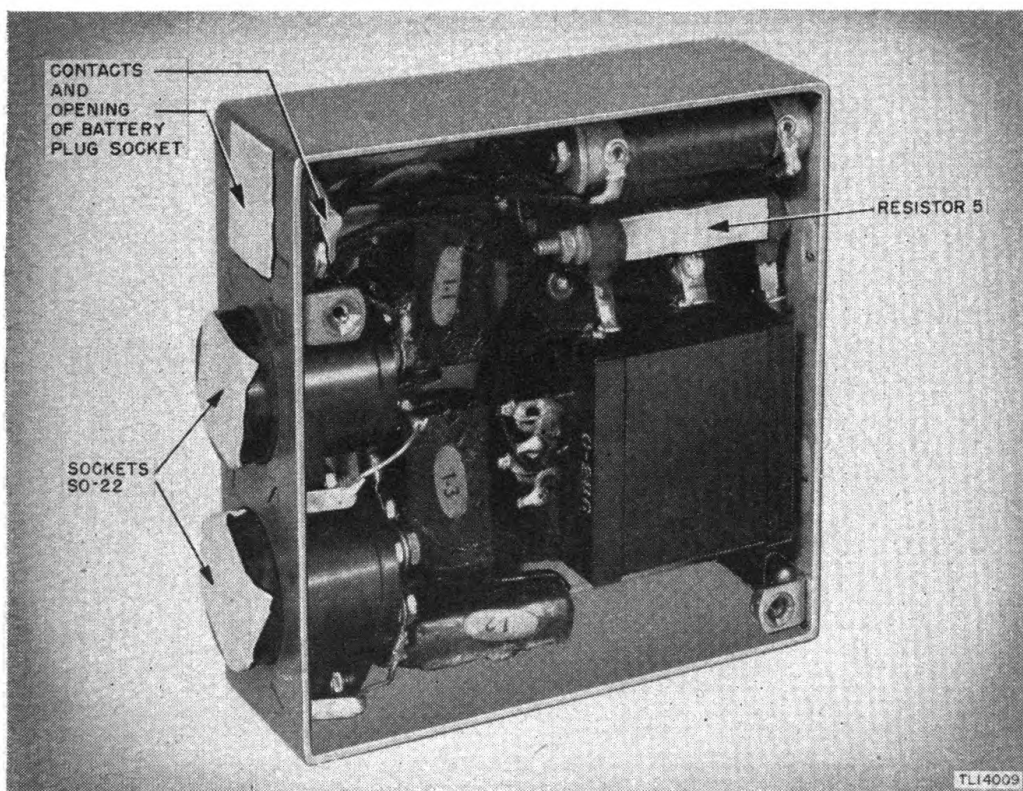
Filter FL-10—interior view showing method of masking parts.
